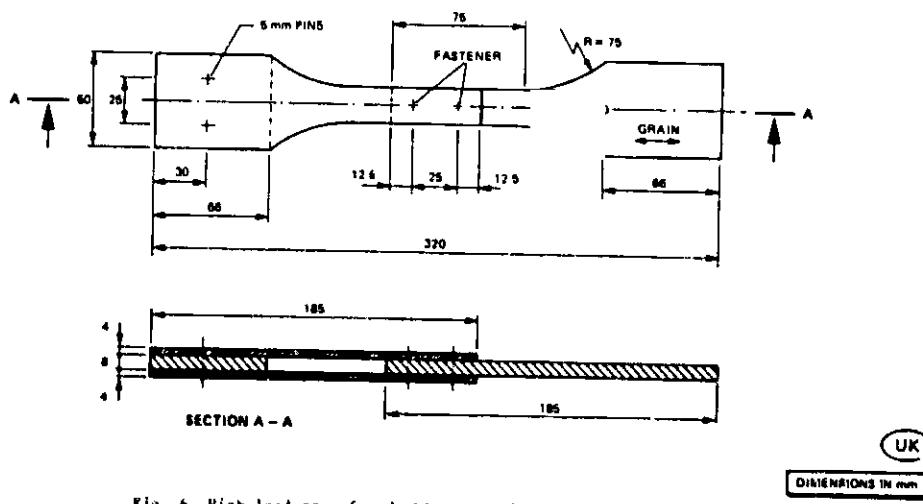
High load transfer double shear joint, type H2 - United Kingdom
